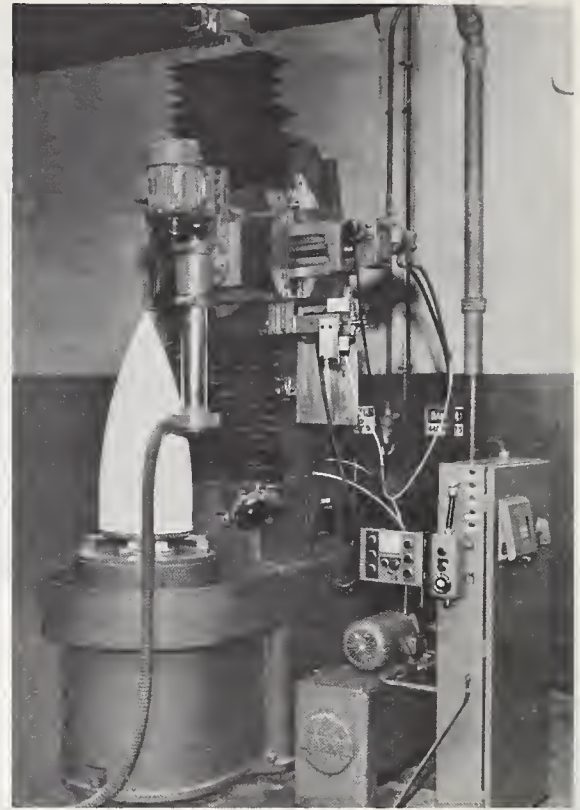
Vertical spindle template grinder using a metal bond diamond grinding wheel.
